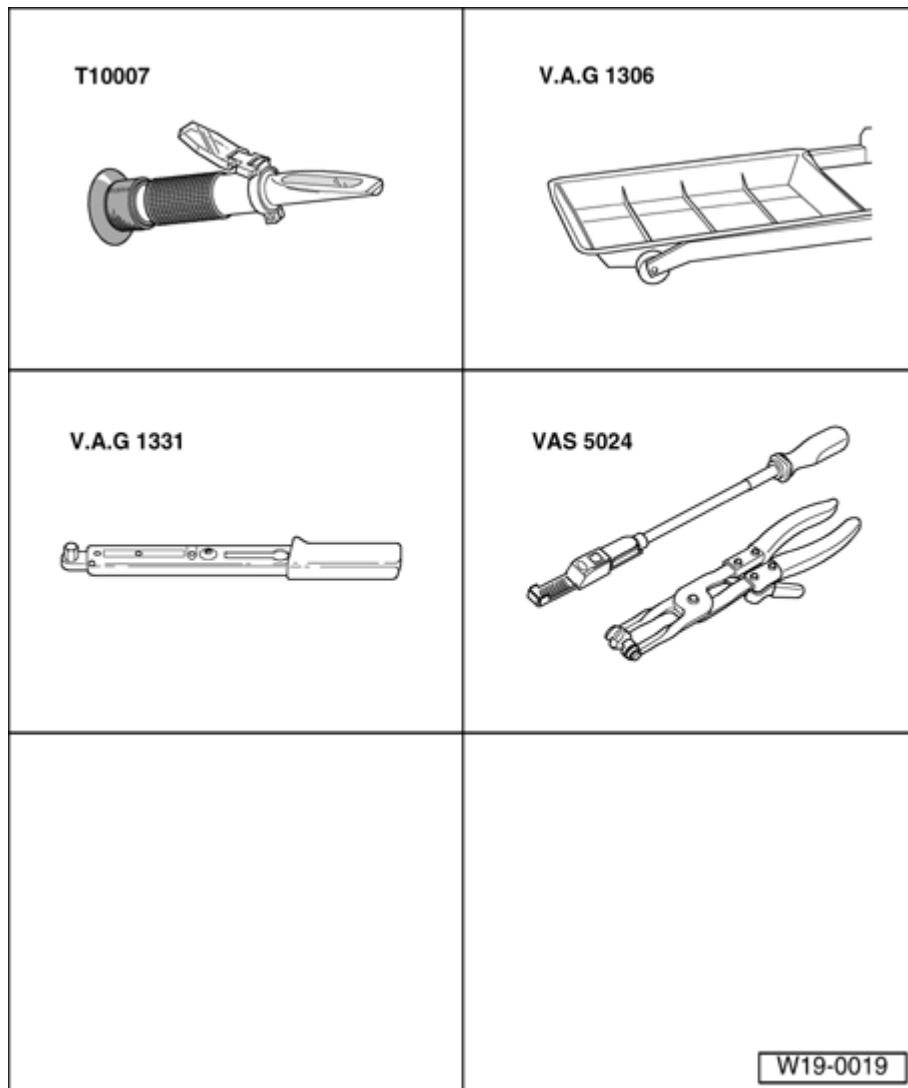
Identifying Special Tools - Cooling System Components, Servicing, Removing And Installing
